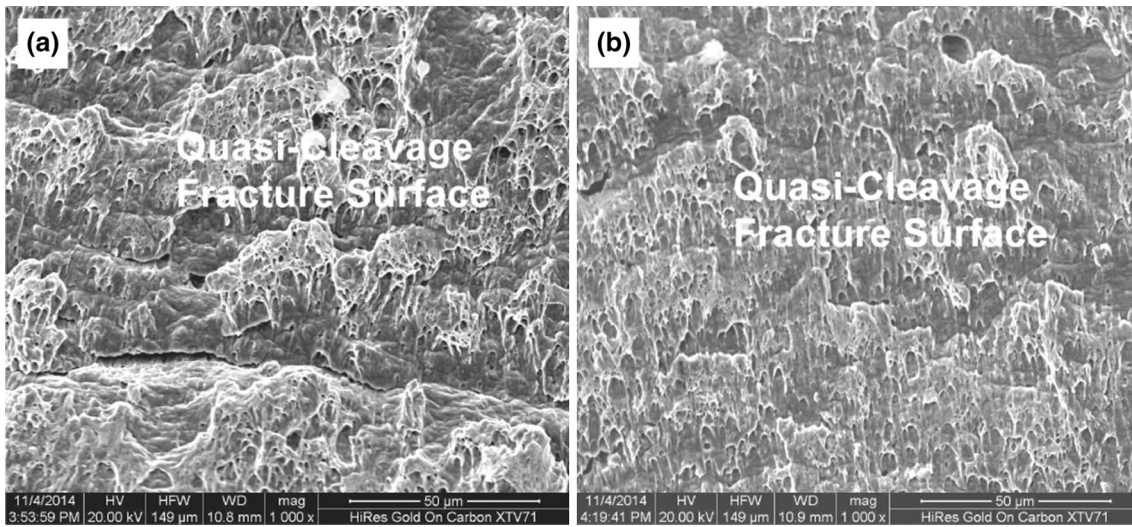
Quasi-cleavage fracture surfaces of both steels (a) steel A; (b) steel B
